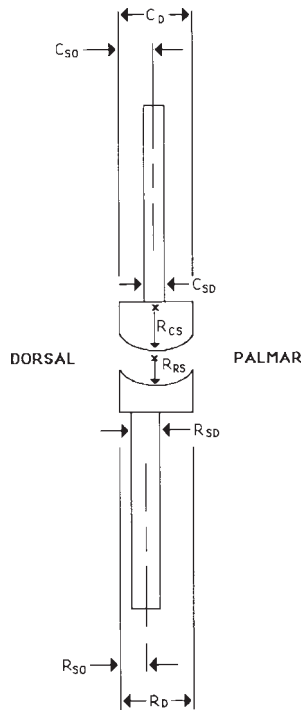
Dimensions of Wrist Joint Replacements (Sagittal Plane)
